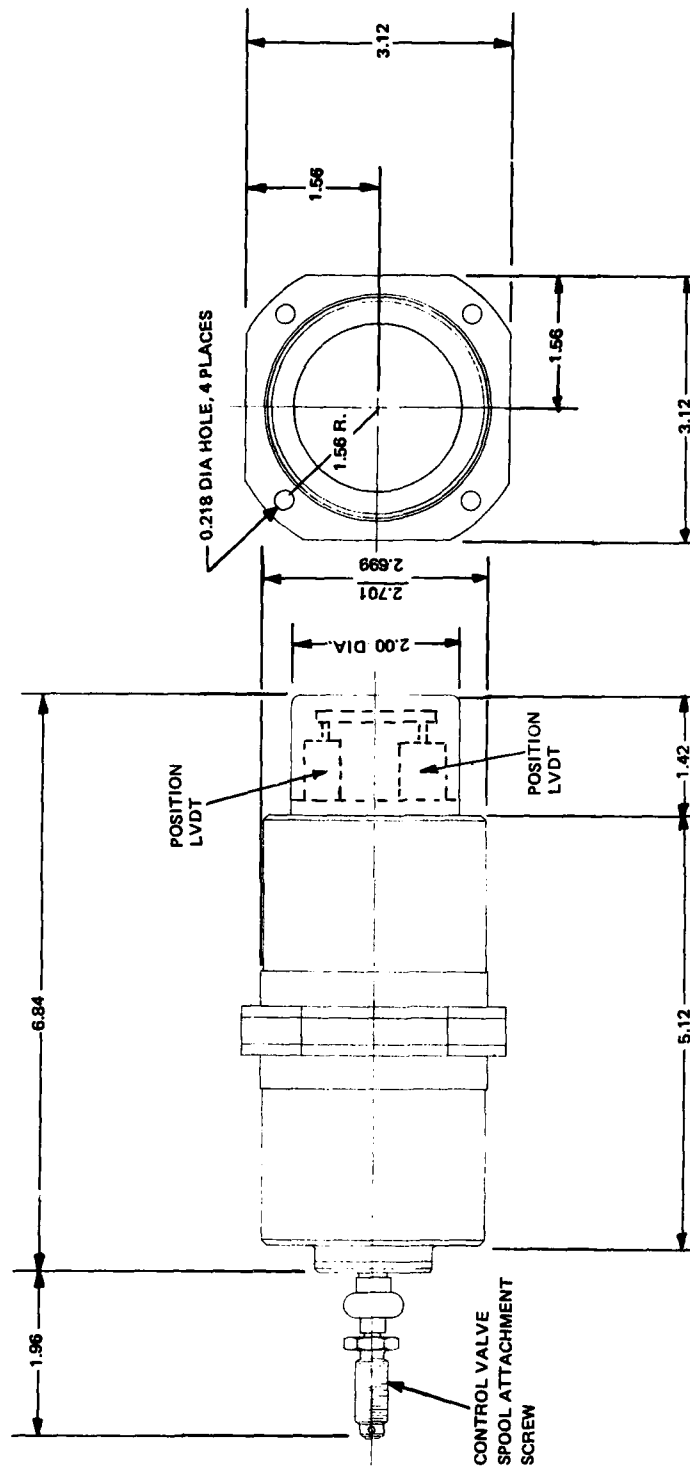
Linear Motion Bi-Directional Force Motor Outline Drawing
